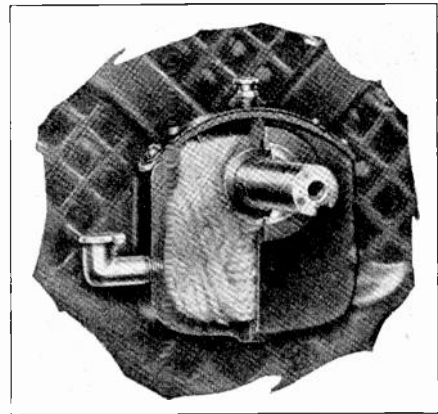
Bearing with cotton filled oil well, for wick oil feed action to shaft.
